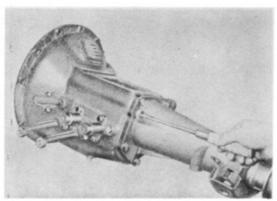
Removing Gear Shift Fork Shaft Lock Screw
